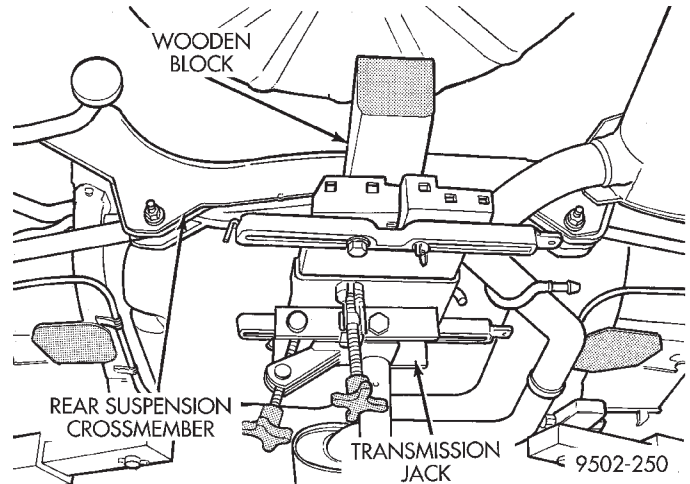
Lowering And Supporting Rear Suspension Crossmember
